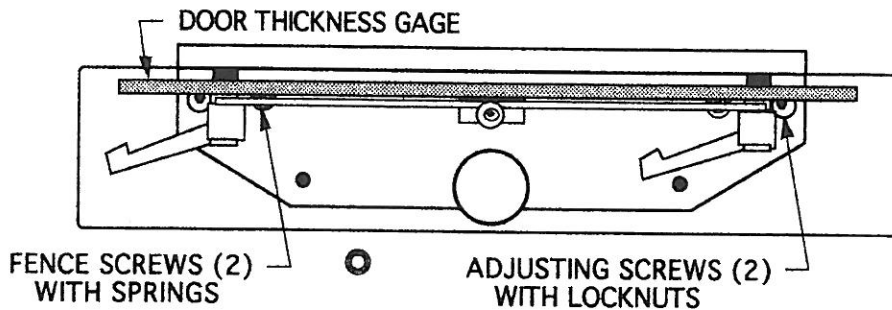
Fence screws and adjusting screws for adjusting the door thickness gage.
